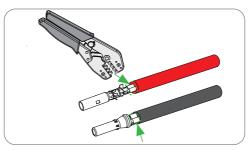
Inserting the PV pin contact and Crimping the terminal
